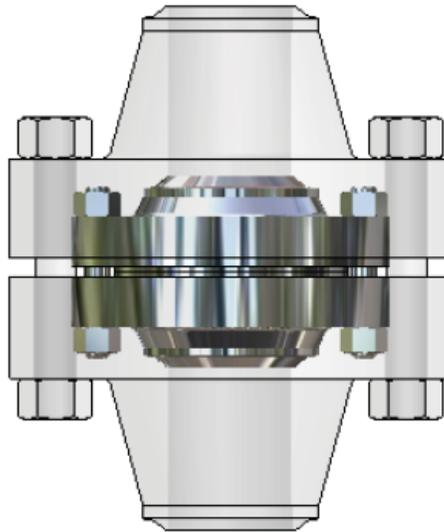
The Grayloc compact flange assembly superimposed on top of a standard ASME flange, showing size difference for same class of connection assembly.
